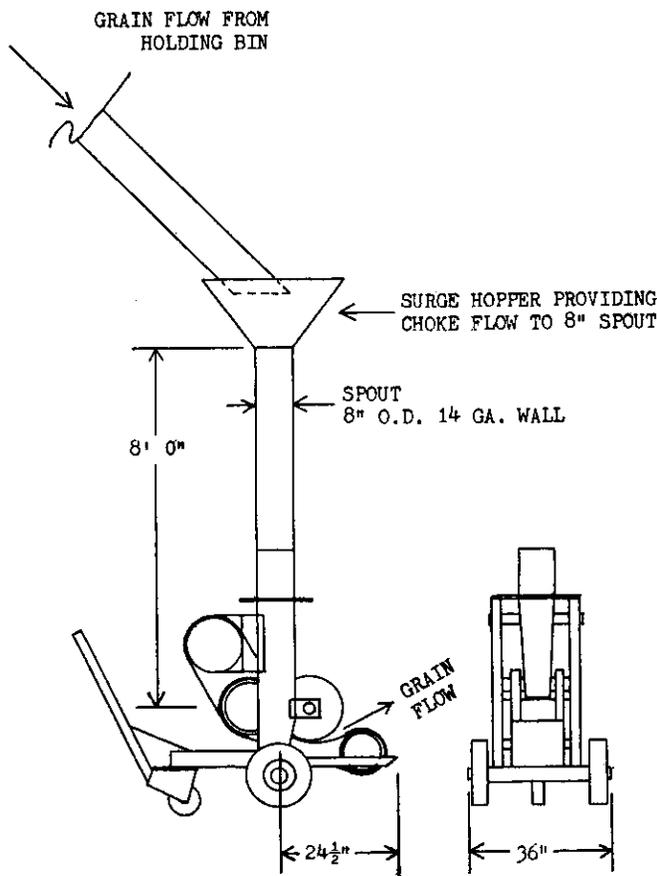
Grain thrower used for breakage tests (Stephens-Adamson 16-in. swivel piler)
